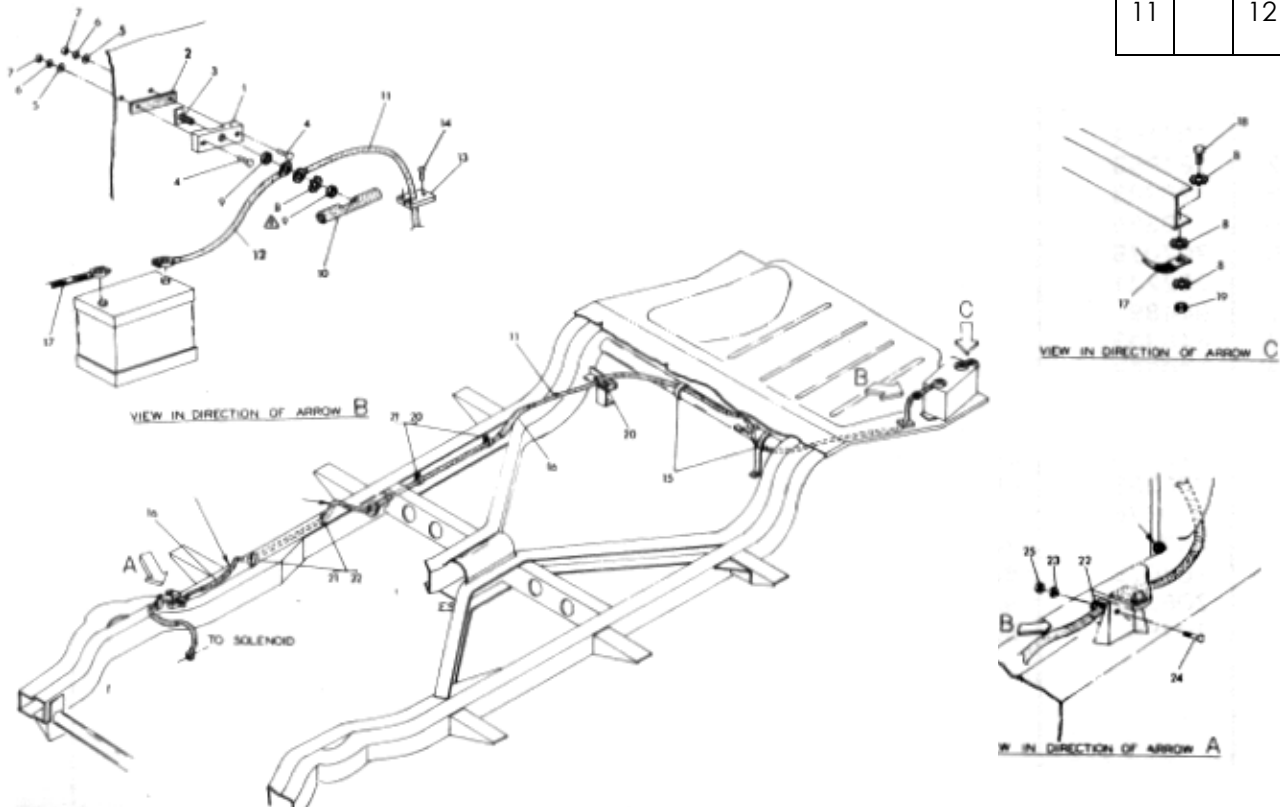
Split Cable Installation. Rear Mounted Battery
